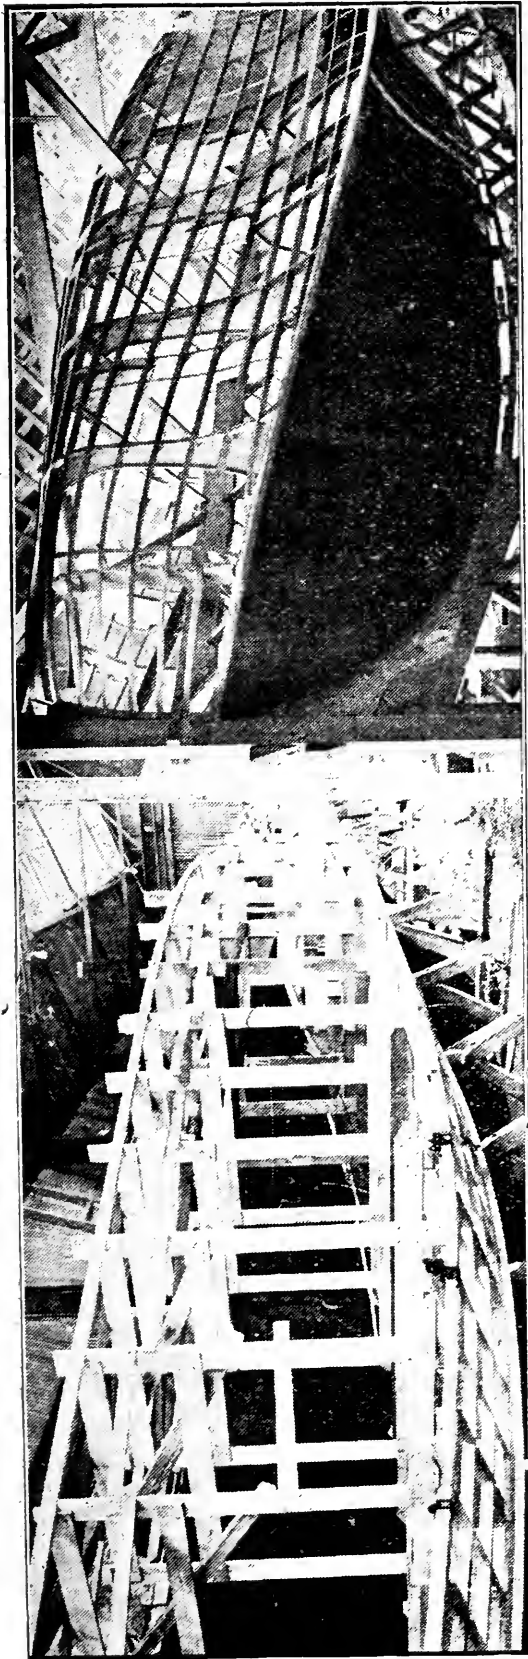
F' bodl, showing wrong method of holding moulds together.
